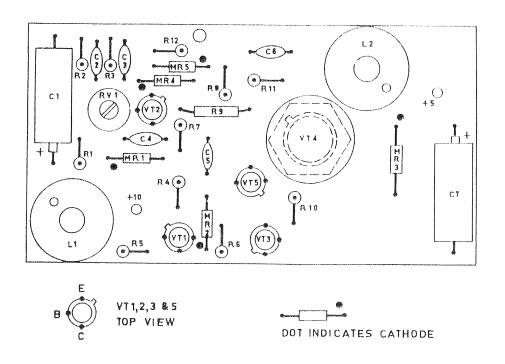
VOLT REGULATOR 10-4CB1 - COMPONENT LAYOUT
